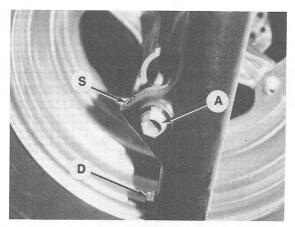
Axle shaft pinch screw (S) must be loosened prior to removing axle shaft (A). Remove drain plug (D) to drain oil from fork tube.
